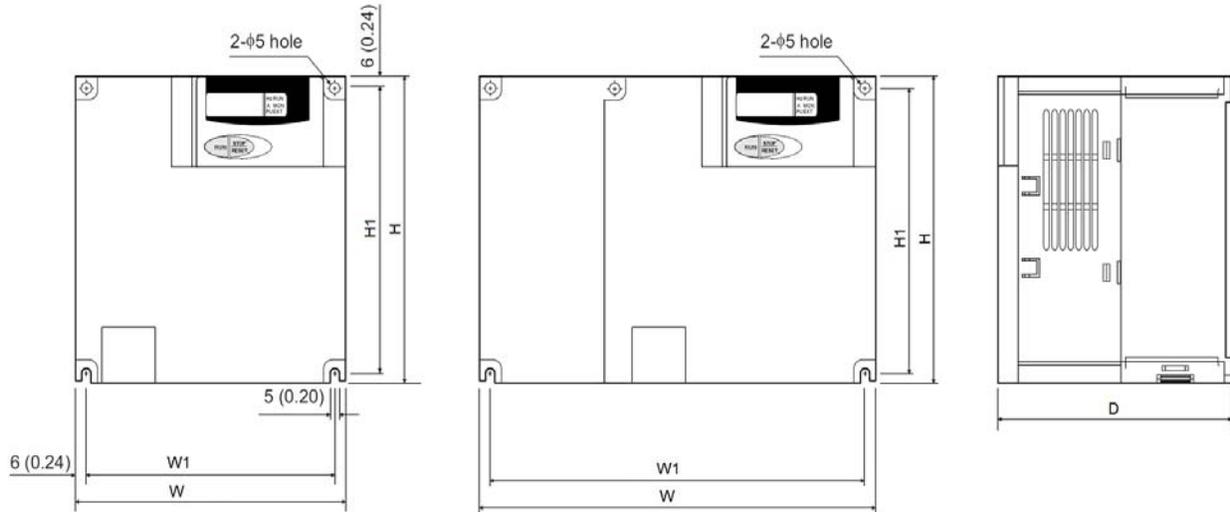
Dimensions for VFD68Dxx Drives, mm (in.)
